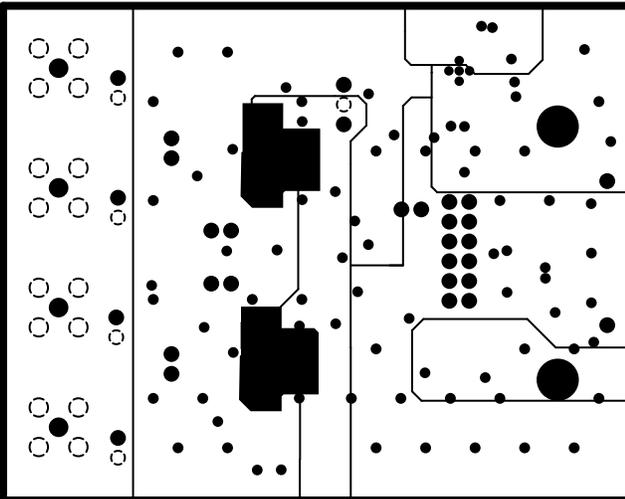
ADS8354EVM PCB Layer 3: Power Plane
